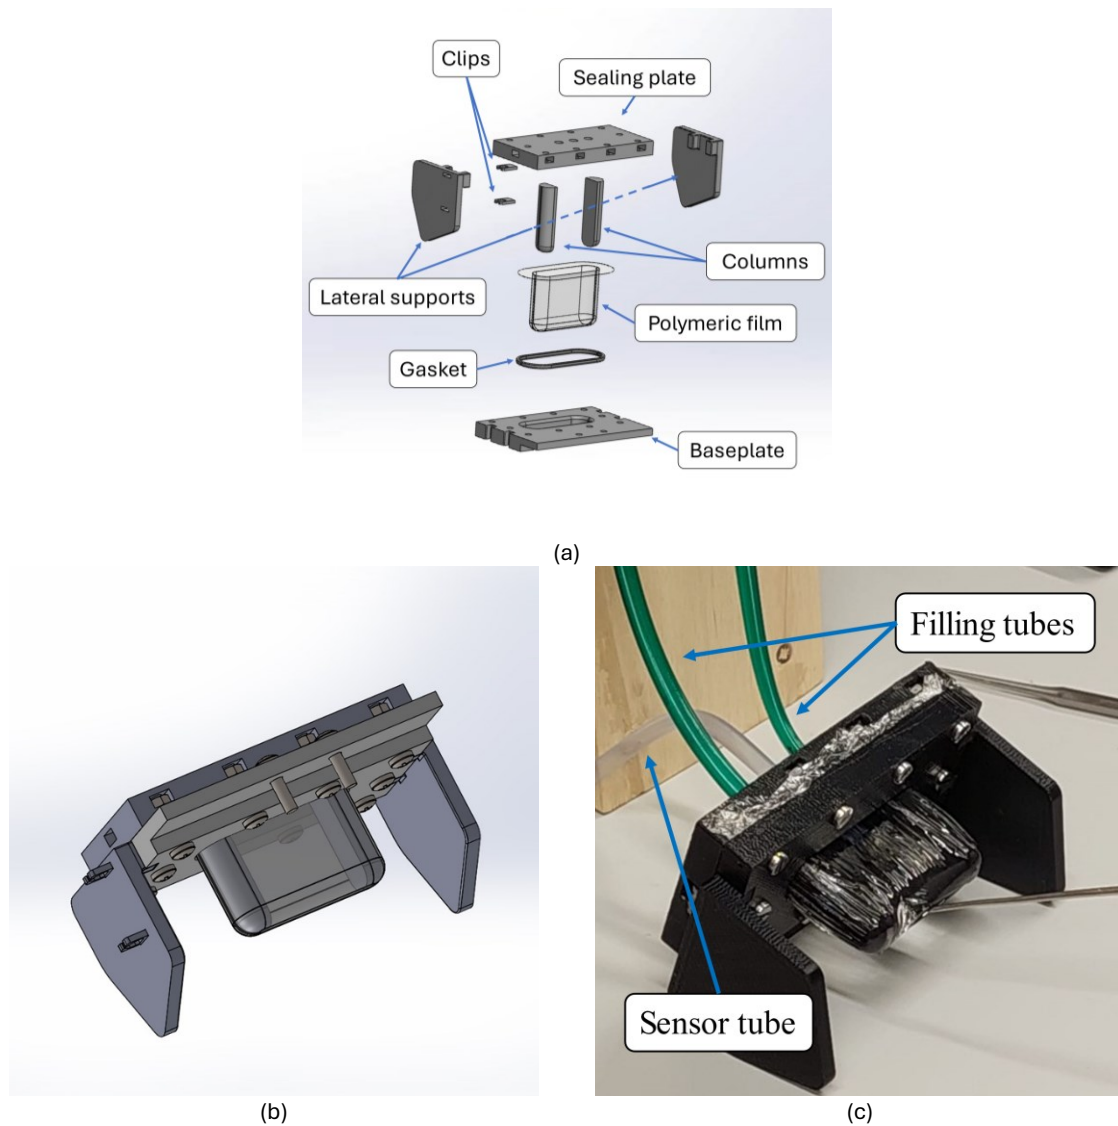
CAD model of the tank. Exploded view of the tank system (a), the CAD of the assembled tank (b) and the tank assembled (c).
